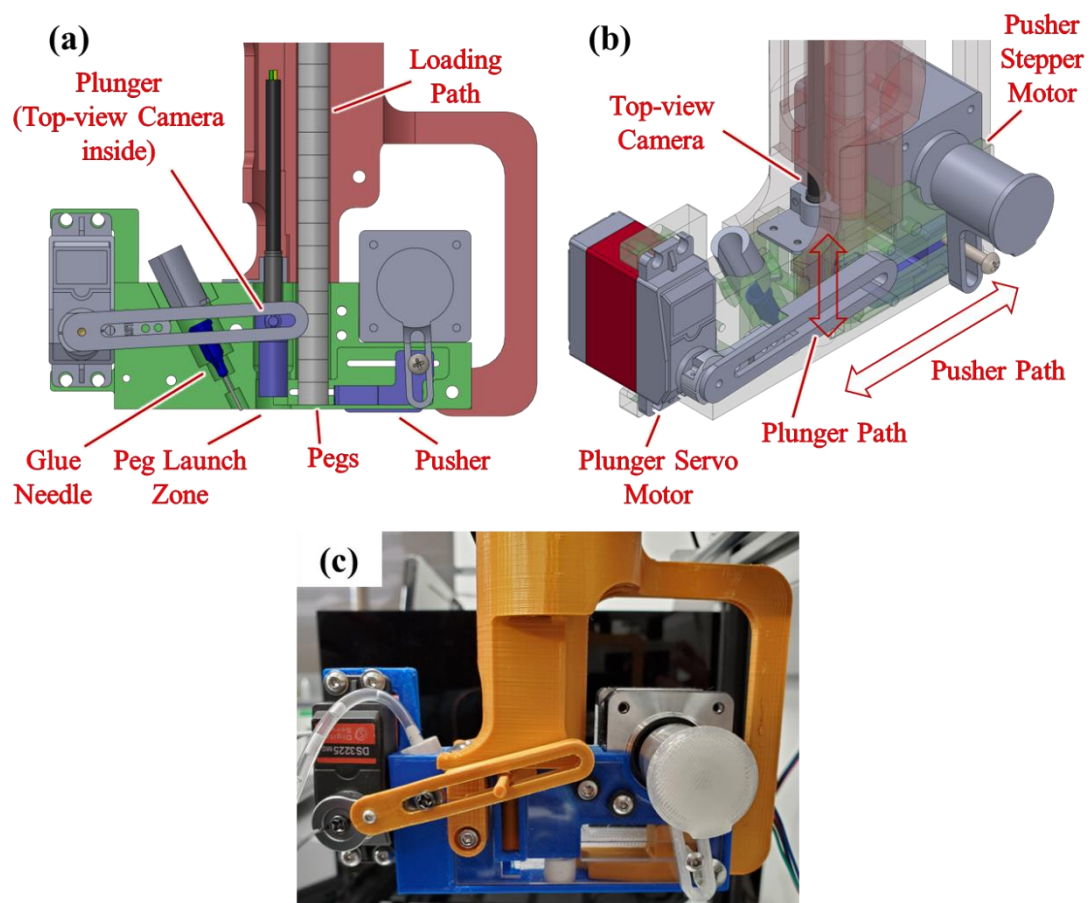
Peg insertion tool. (a) Cross-sectional view. (b) Isometric view. (c) 3D printed prototype.
